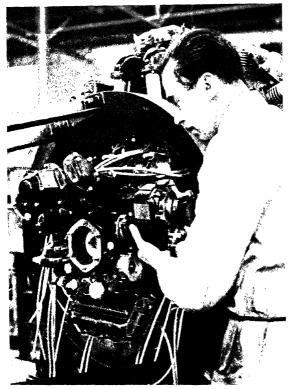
Assembling single contact breaker magneto to rear cover.
